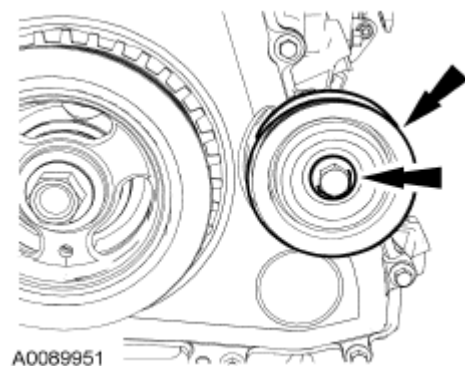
Locating Accessory Drive Belt Idler Pulley (1 Of 2)
